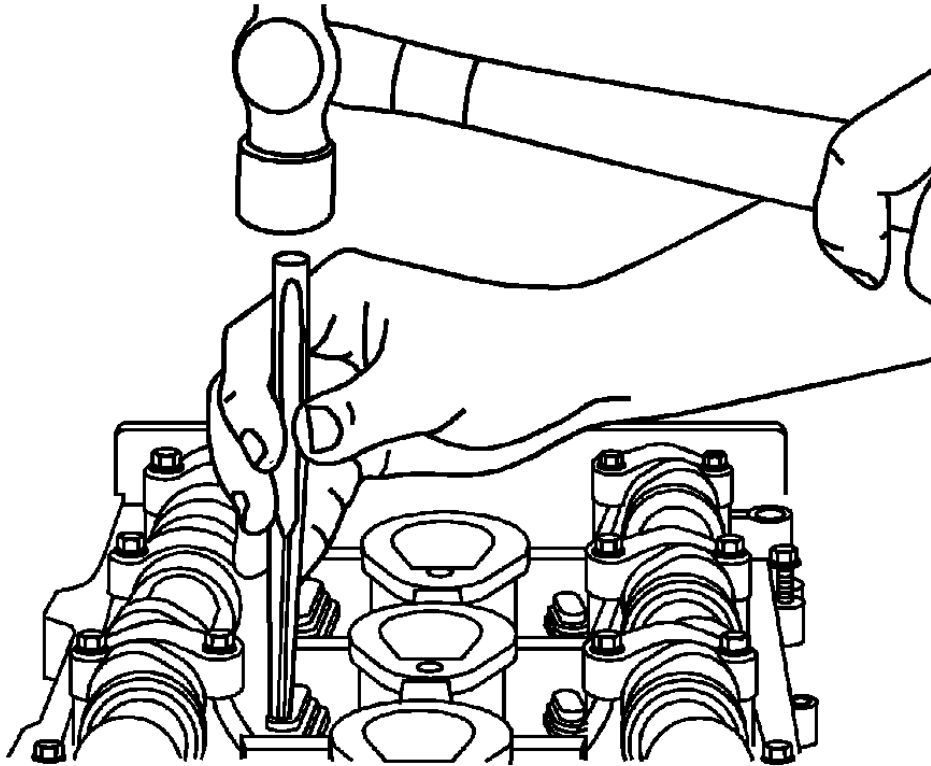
Striking Head Bolts With Hammer Prior To Removal
